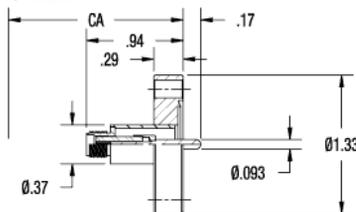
Conflat flange with SMA coaxial feedthrough. Shown here is a possible model by MDC Vacuum Products. Dimensions in inches.
